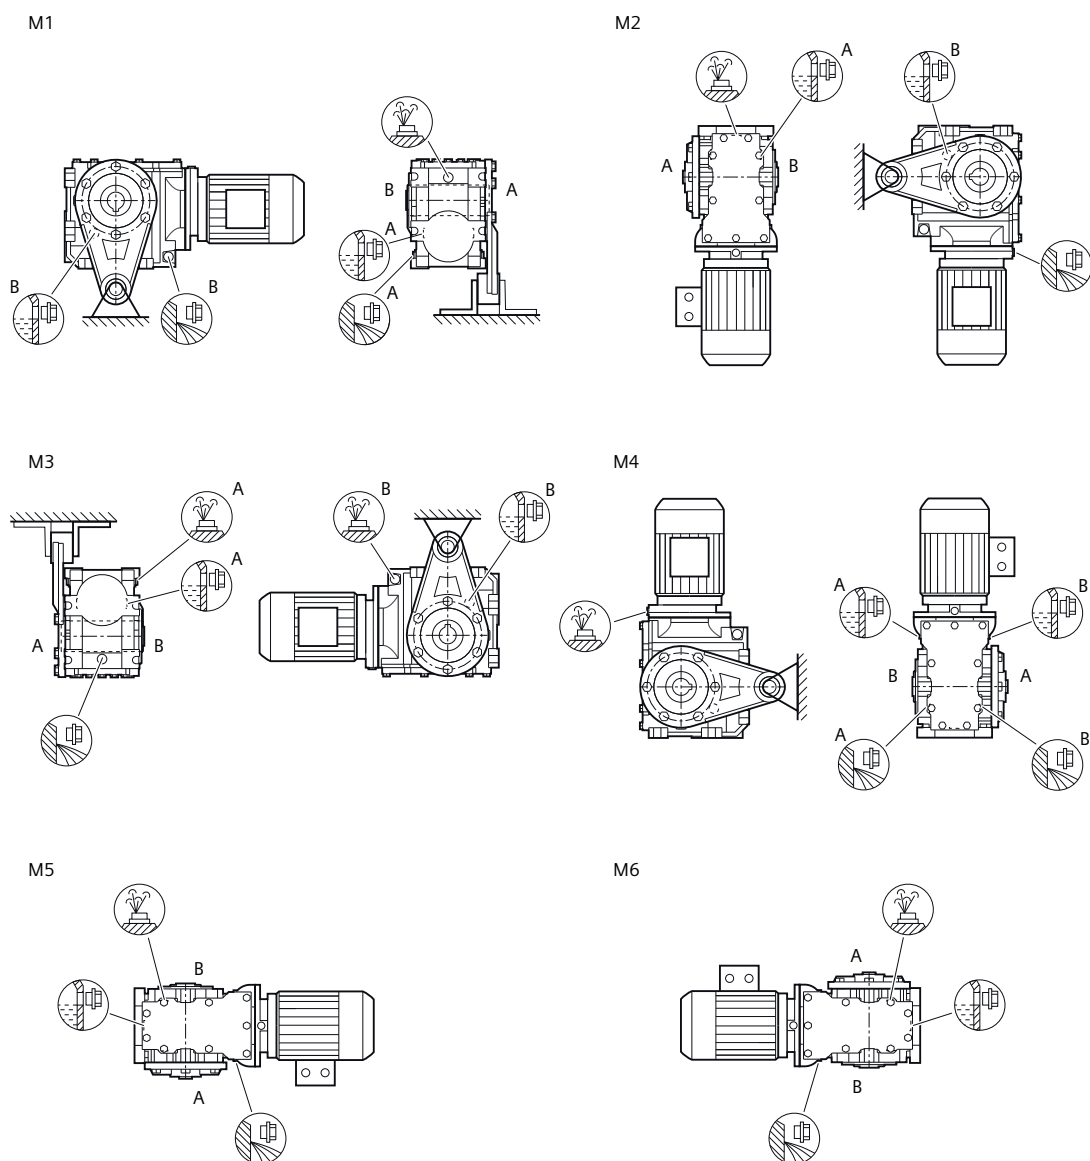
Mounting positions for helical worm gearbox CAD shaft-mounted design, size 39A
